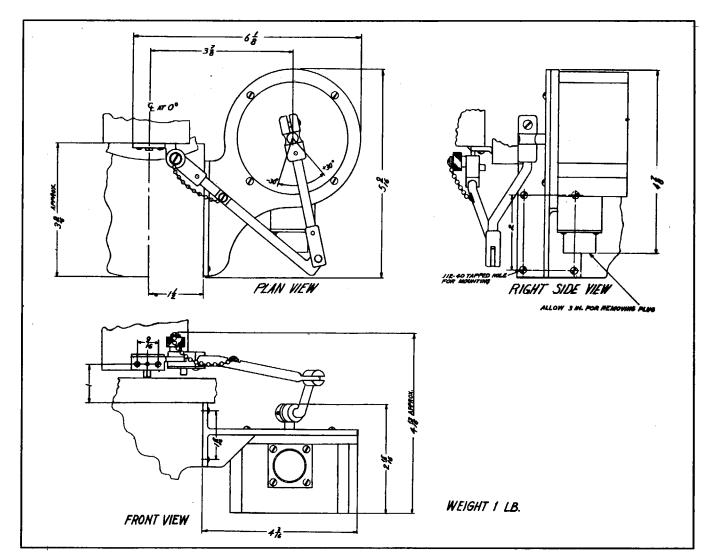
Compensator CN-1/APQ-5—Outline Dimensions
